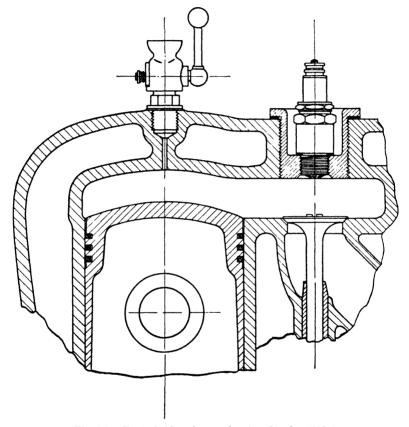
Typical side-valve combustion chamber (1914)
